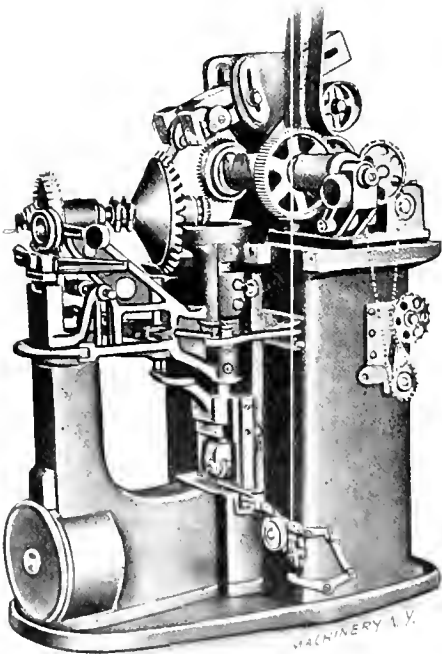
The Rice Bevel Gear Milling Machine, which Forms the Teeth from a Master Gear on the Templet Principle.
